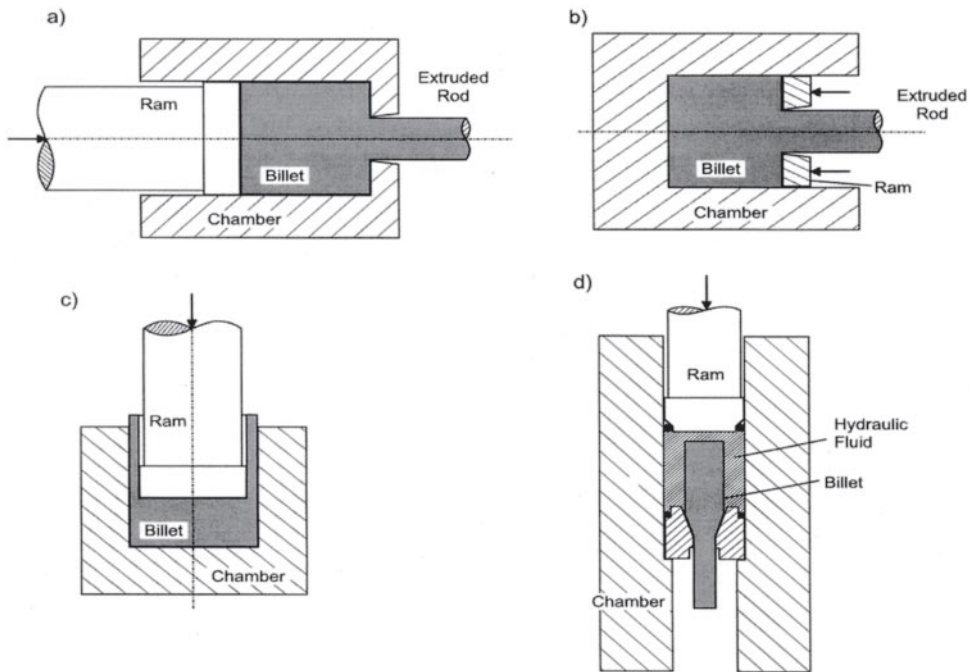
Schematics of extrusion processes: (a) direct or forward extrusion; (b) indirect or reverse extrusion; (c) impact extrusion; and (d) hydrostatic extrusion. (From Ref. 6.)
